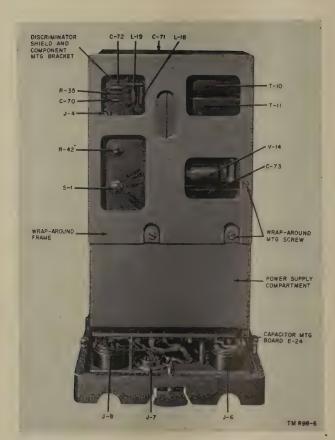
Auxiliary receiver panel-chassis assembly, bottom view.
